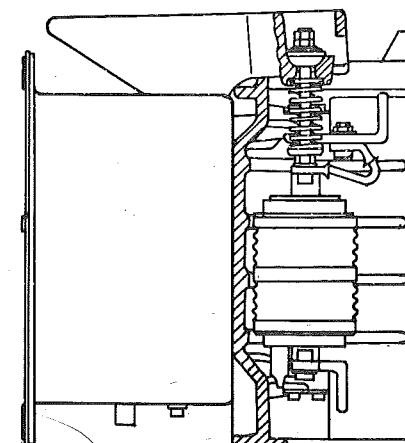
Cross Section of Vacuum Contactor. Side View
